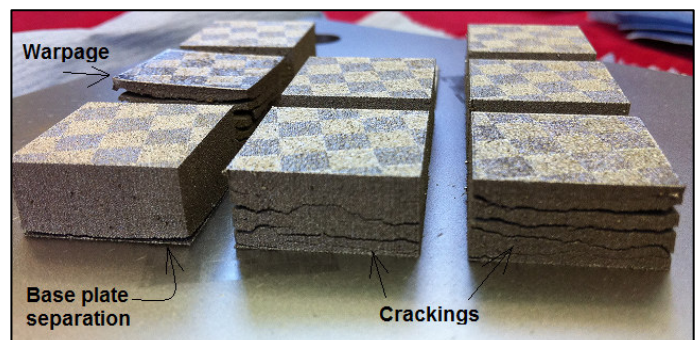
Parts showing crackings, base plate separation and warpage.
